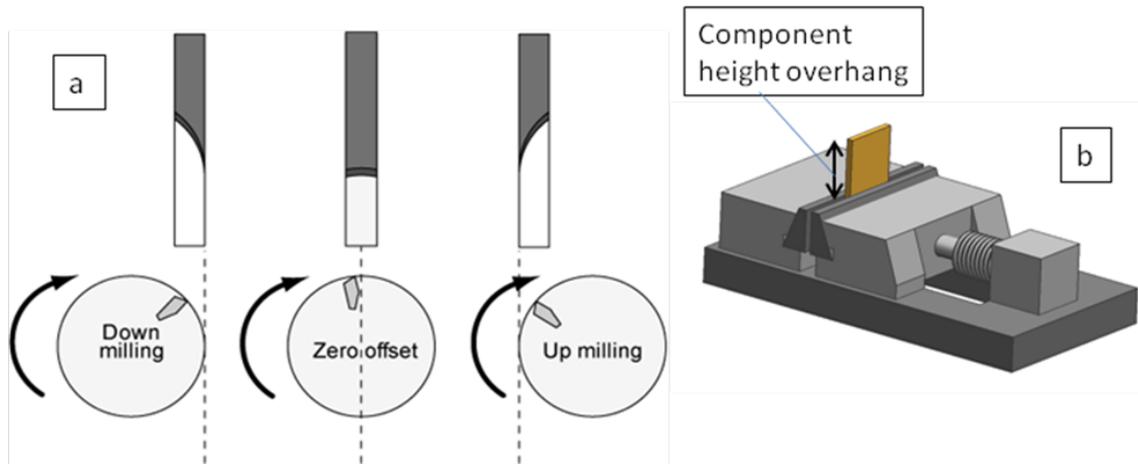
a: Top view of the offset positions used in this study. b: Clamping of workpiece.
